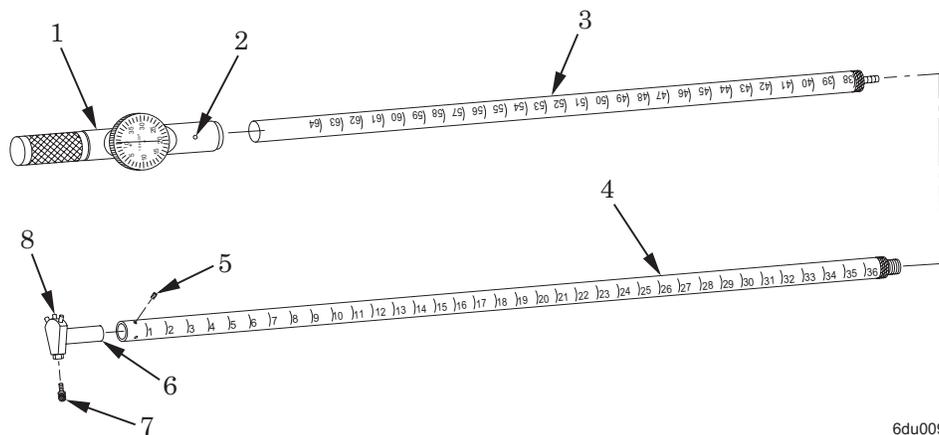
Disassembly/Assembly of Dial Bore Gage.
